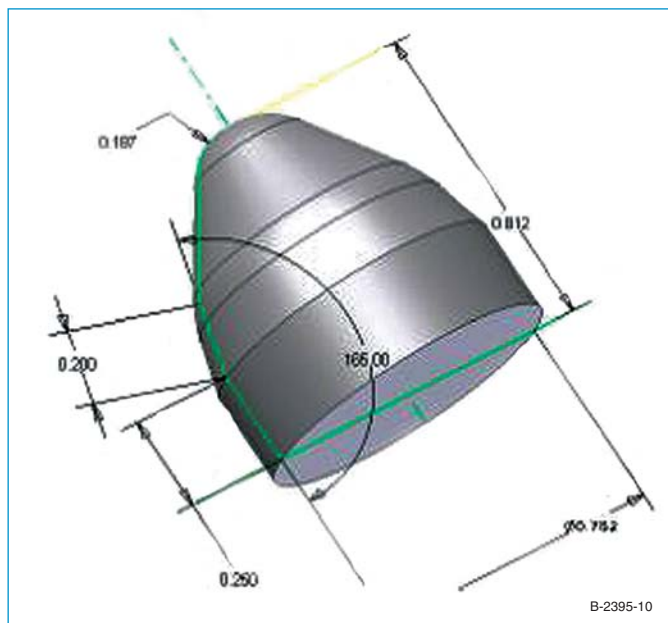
Dimensions and shape of diaphragm air mass loading regulator. The shape is specific for this driver with the specified dimpling pattern. This shape is unlikely to be optimum for other drivers.
